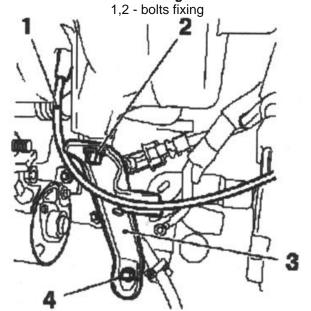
Withdrawal support Intake collectors: 1 - vacuum hose, 2, 4 - mounting screws, 3 - support
